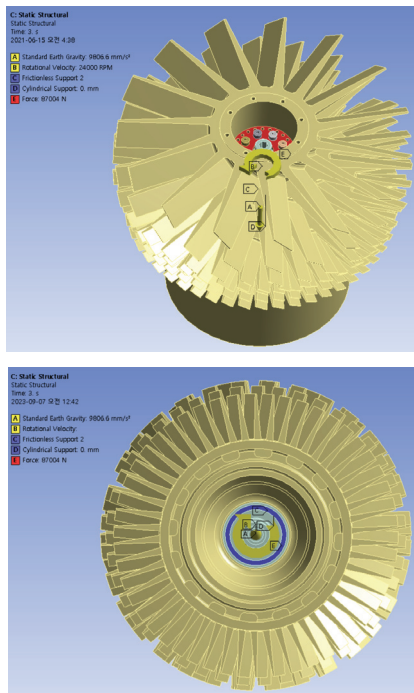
Loading and Boundary Condition for Rotating Parts Assembly of Large Capacity TMP
